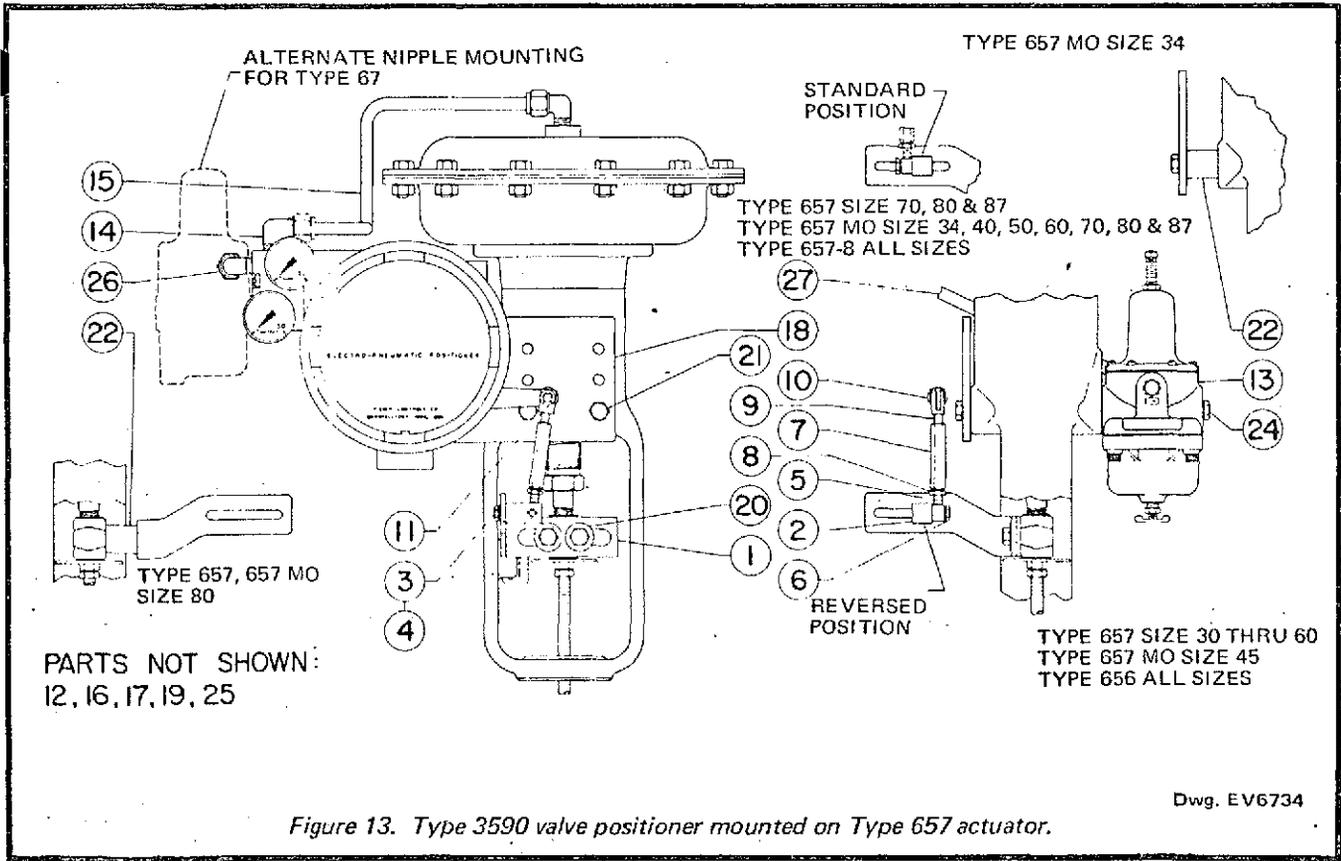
Type 3590 valve positioner mounted on Type 657 actuator.
